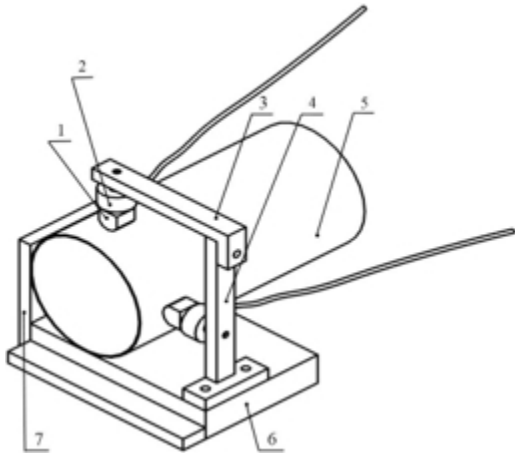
Fixture and clamping-force measuring device (1 - Pressure block, 2 - Force sensor, 3 - Bracket A, 4 - Bracket B, 5 - Workpiece, 6 - Foundation bed, 7 - Locating base).
